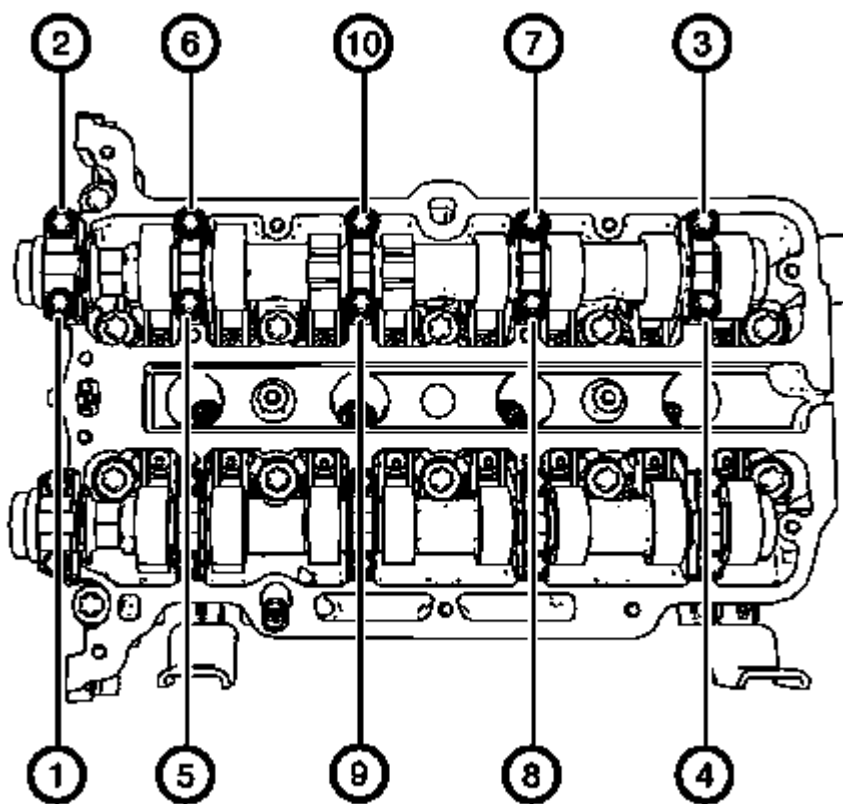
Intake Camshaft Bearing Cap Bolts Removal Sequence
